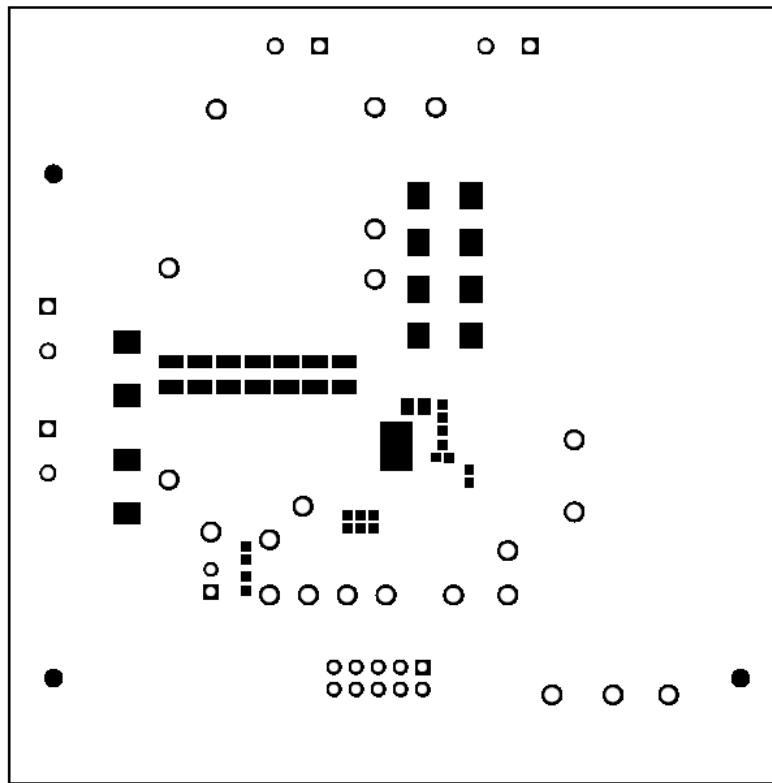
PWR-784EVM Bottom Solder Mask (Top View)
